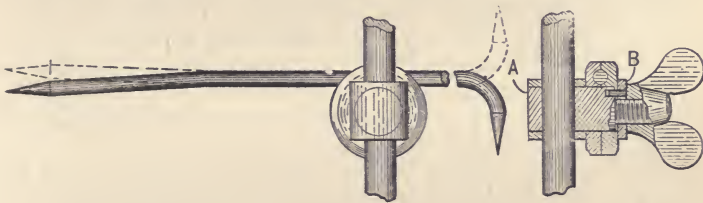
ADJUSTABLE SURFACE-GAGE.
